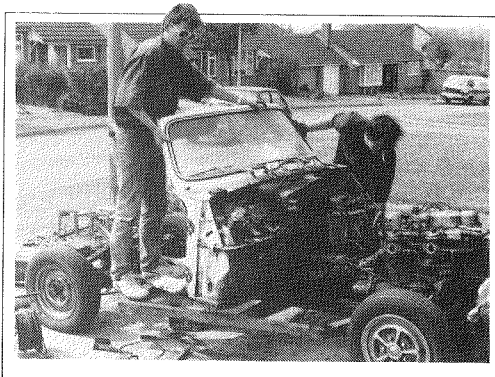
As with the rear section, have a good look around to ensure that there aren't any cables, wires, brake/clutch/water pipes etc. still connecting the bulkhead to either the chassis or engine. When all's clear lift off.
